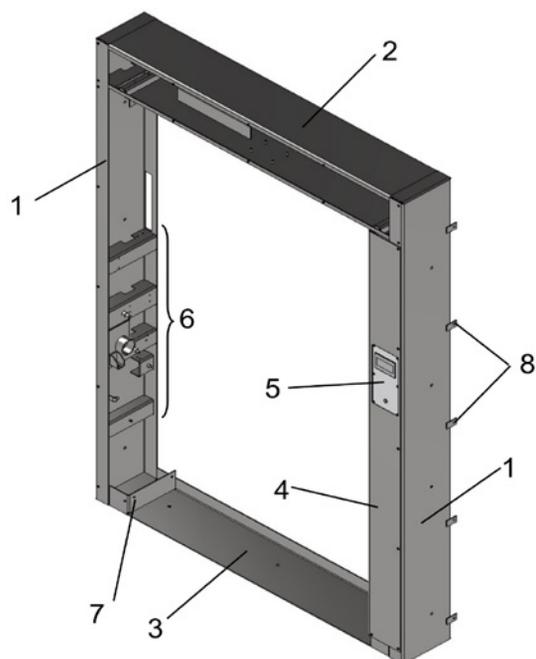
Frame of the window-to-balcony case welded from bent steel profiles: 1 – vertical profiles (columns); 2 – top profile with a drive system case; 3 – bottom profile; 4 – cover mounted on the case; 5 – control panel; 6 – supports with mechanism assembly elements; 7 – cover mounting bracket; 8 – anchor bolts for the assembly of the window-to-balcony usable part
